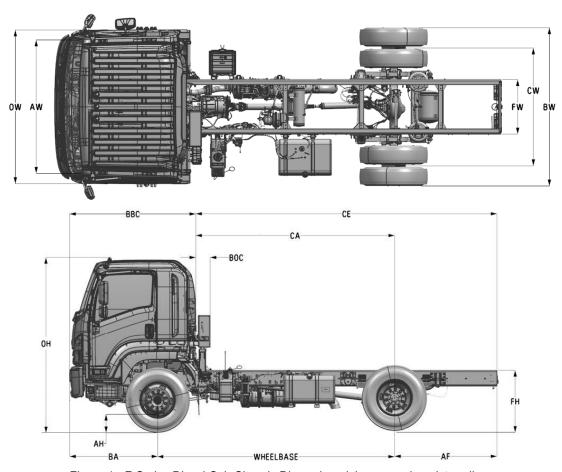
F-Series Diesel Cab Chassis Dimensions (air suspension pictured)
